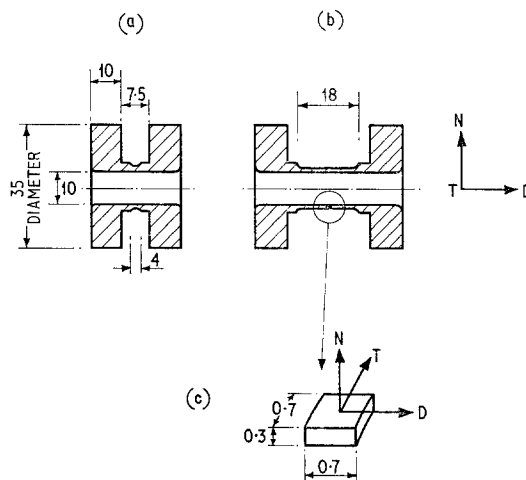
Sections through the flanged tube of polyethylene (a) before and (b) after being drawn on the Instron, together with (c) the sample cut out for the pole figure measurements. All dimensions are in mm.
